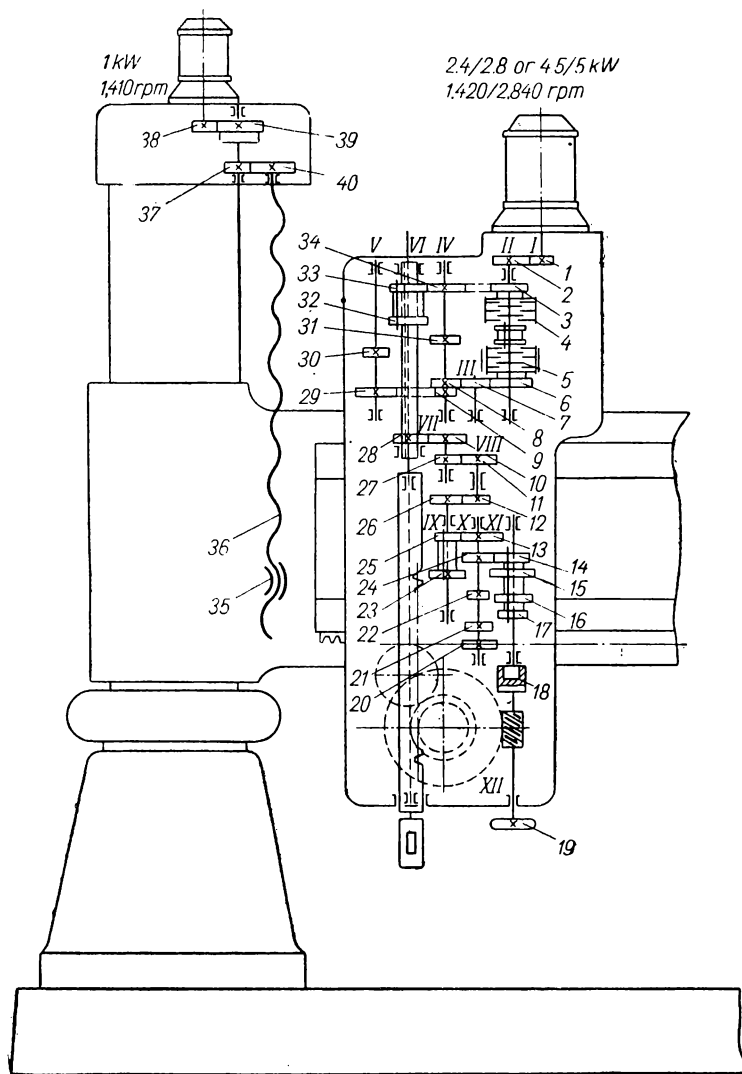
Gearing diagram of the radial drilling machine, model 2A53
